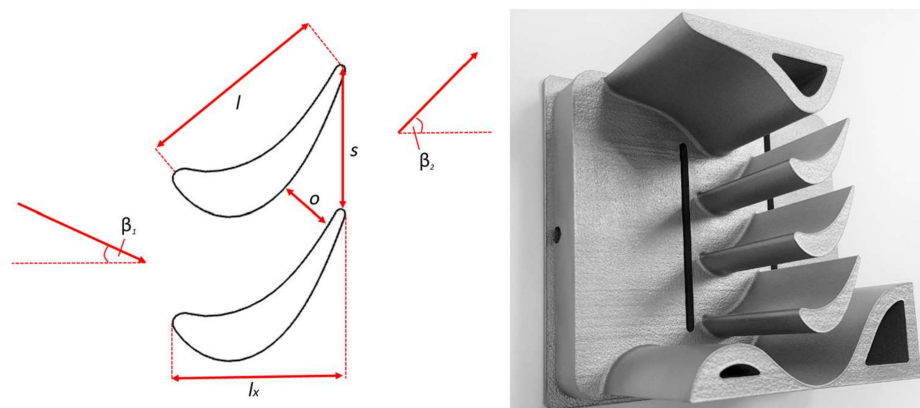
Geometric dimensions of the blade profiles and printed final design cascade.
